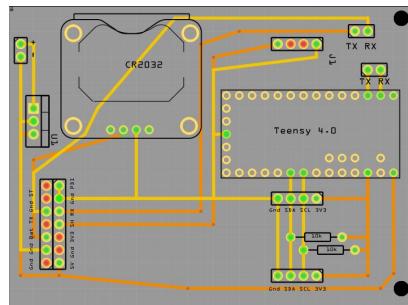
Custom printied circuit board. Integrates all of the electrical components in a small, robust footprint
